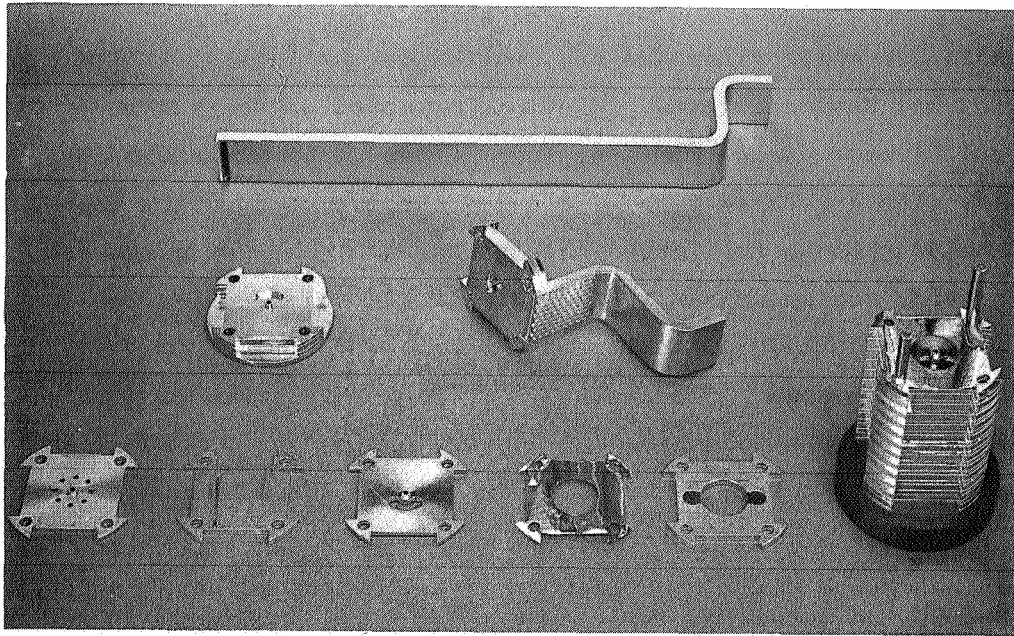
Typical circuit parts of solenoid focused coupled cavity tube.
